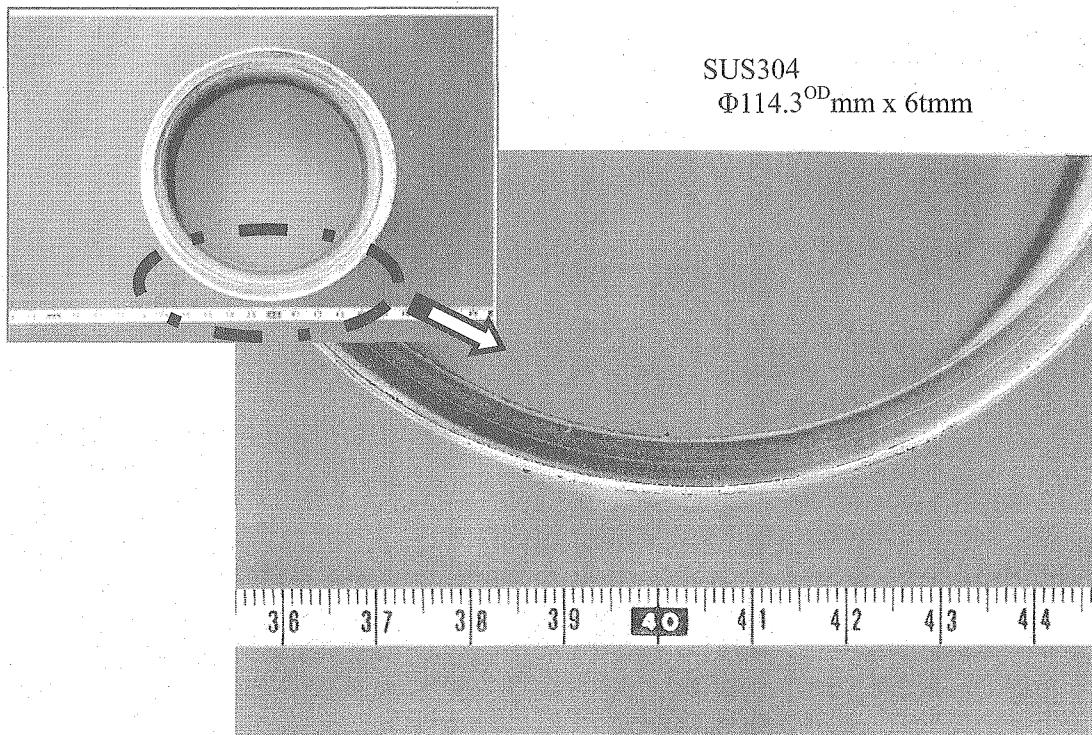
Appearance of cutting section by Disc-Cutter
